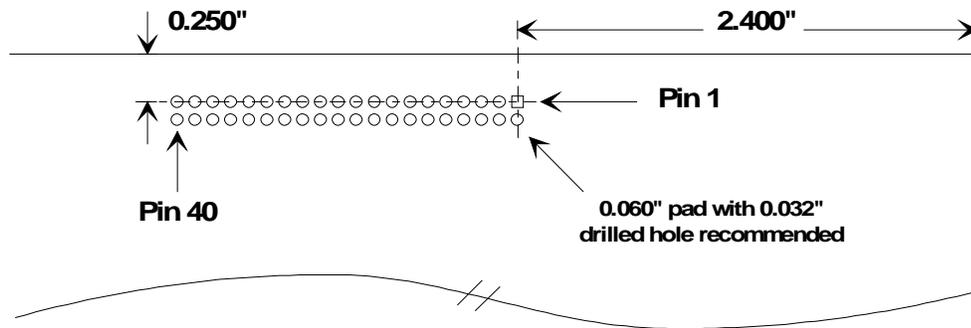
Power Connector location for ASIC Test Bed Printed Circuit Board.
